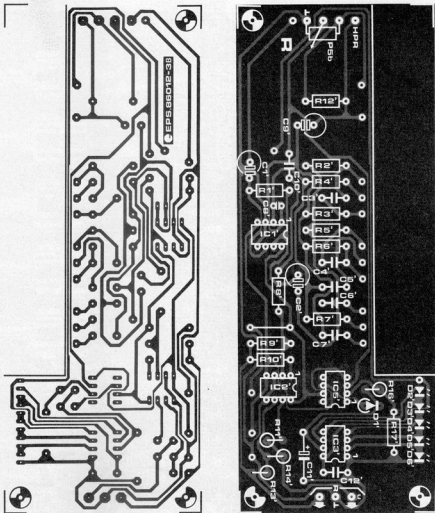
Track layout and component mounting plans for the output module PCBs.
